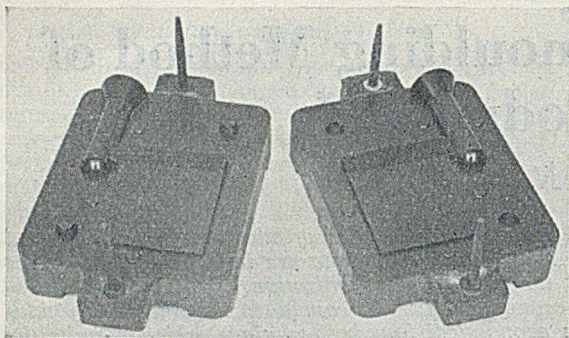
Wedge Patternplates, size 10 by 12 in.
